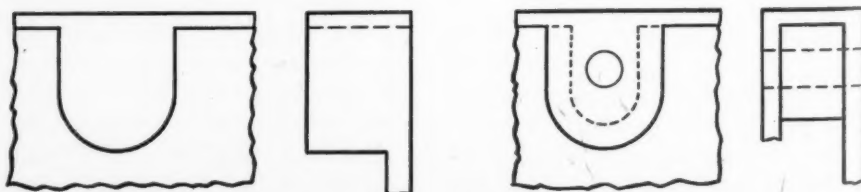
Designing to eliminate shrinkage. Original design (left) of a cast iron kettle developed shrinkage in the top flange alongside a large side boss. As redesigned (right), the center hole was cored and the outside of the boss cut similar to a flanged pipe, thus equalizing the metal and overcoming the trouble.
